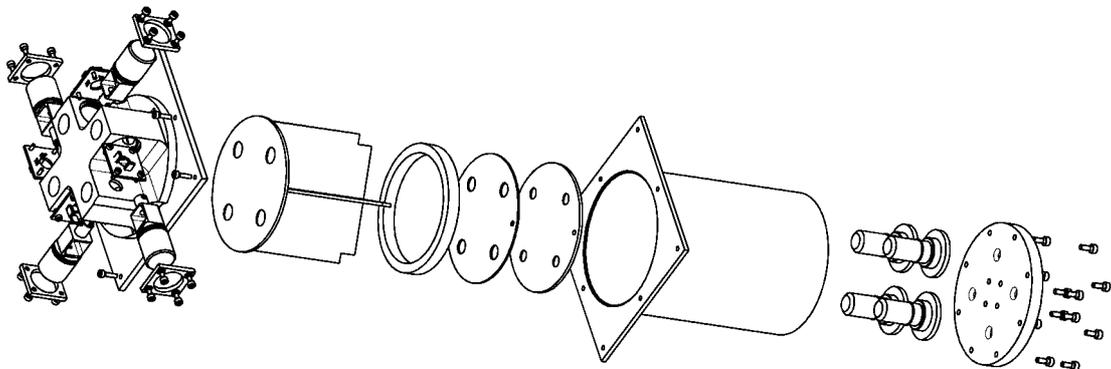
Exploded view of the PMO-PS absolute radiometer.
